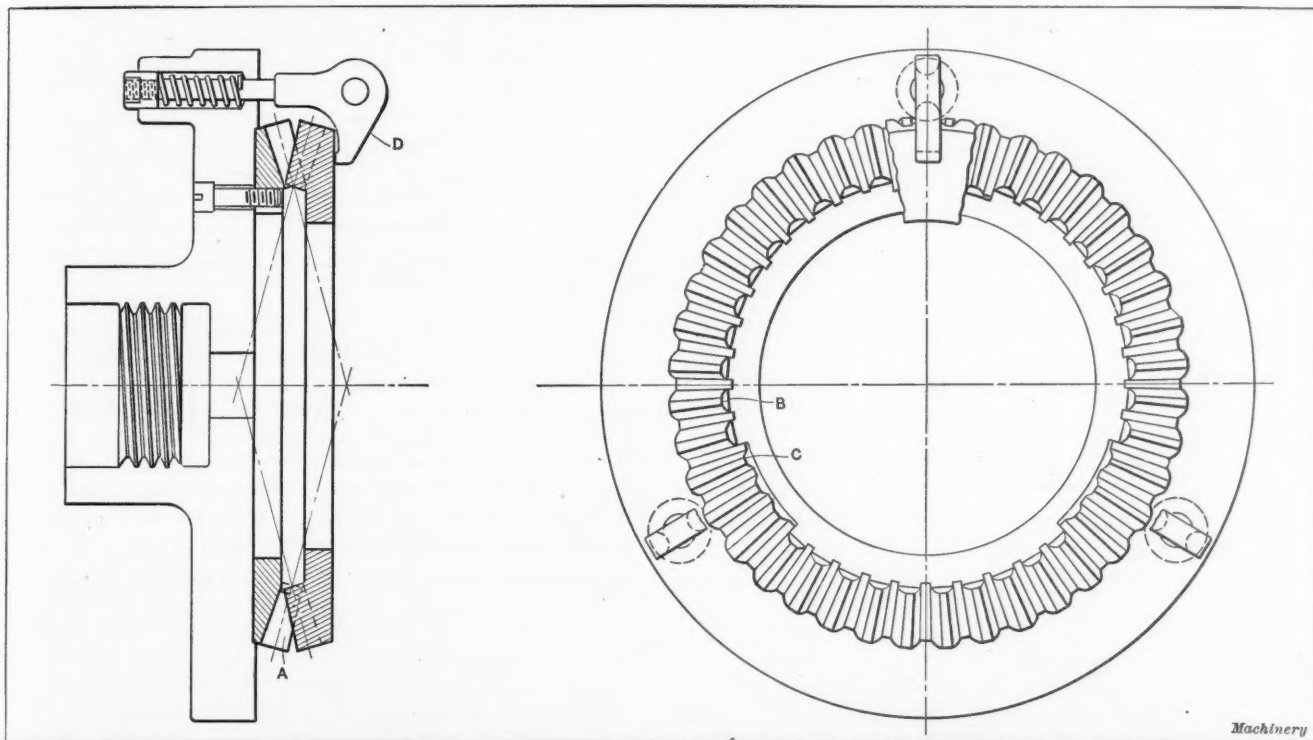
Chuck for Bevel Gear having a Master Gear against which the Work is clamped
